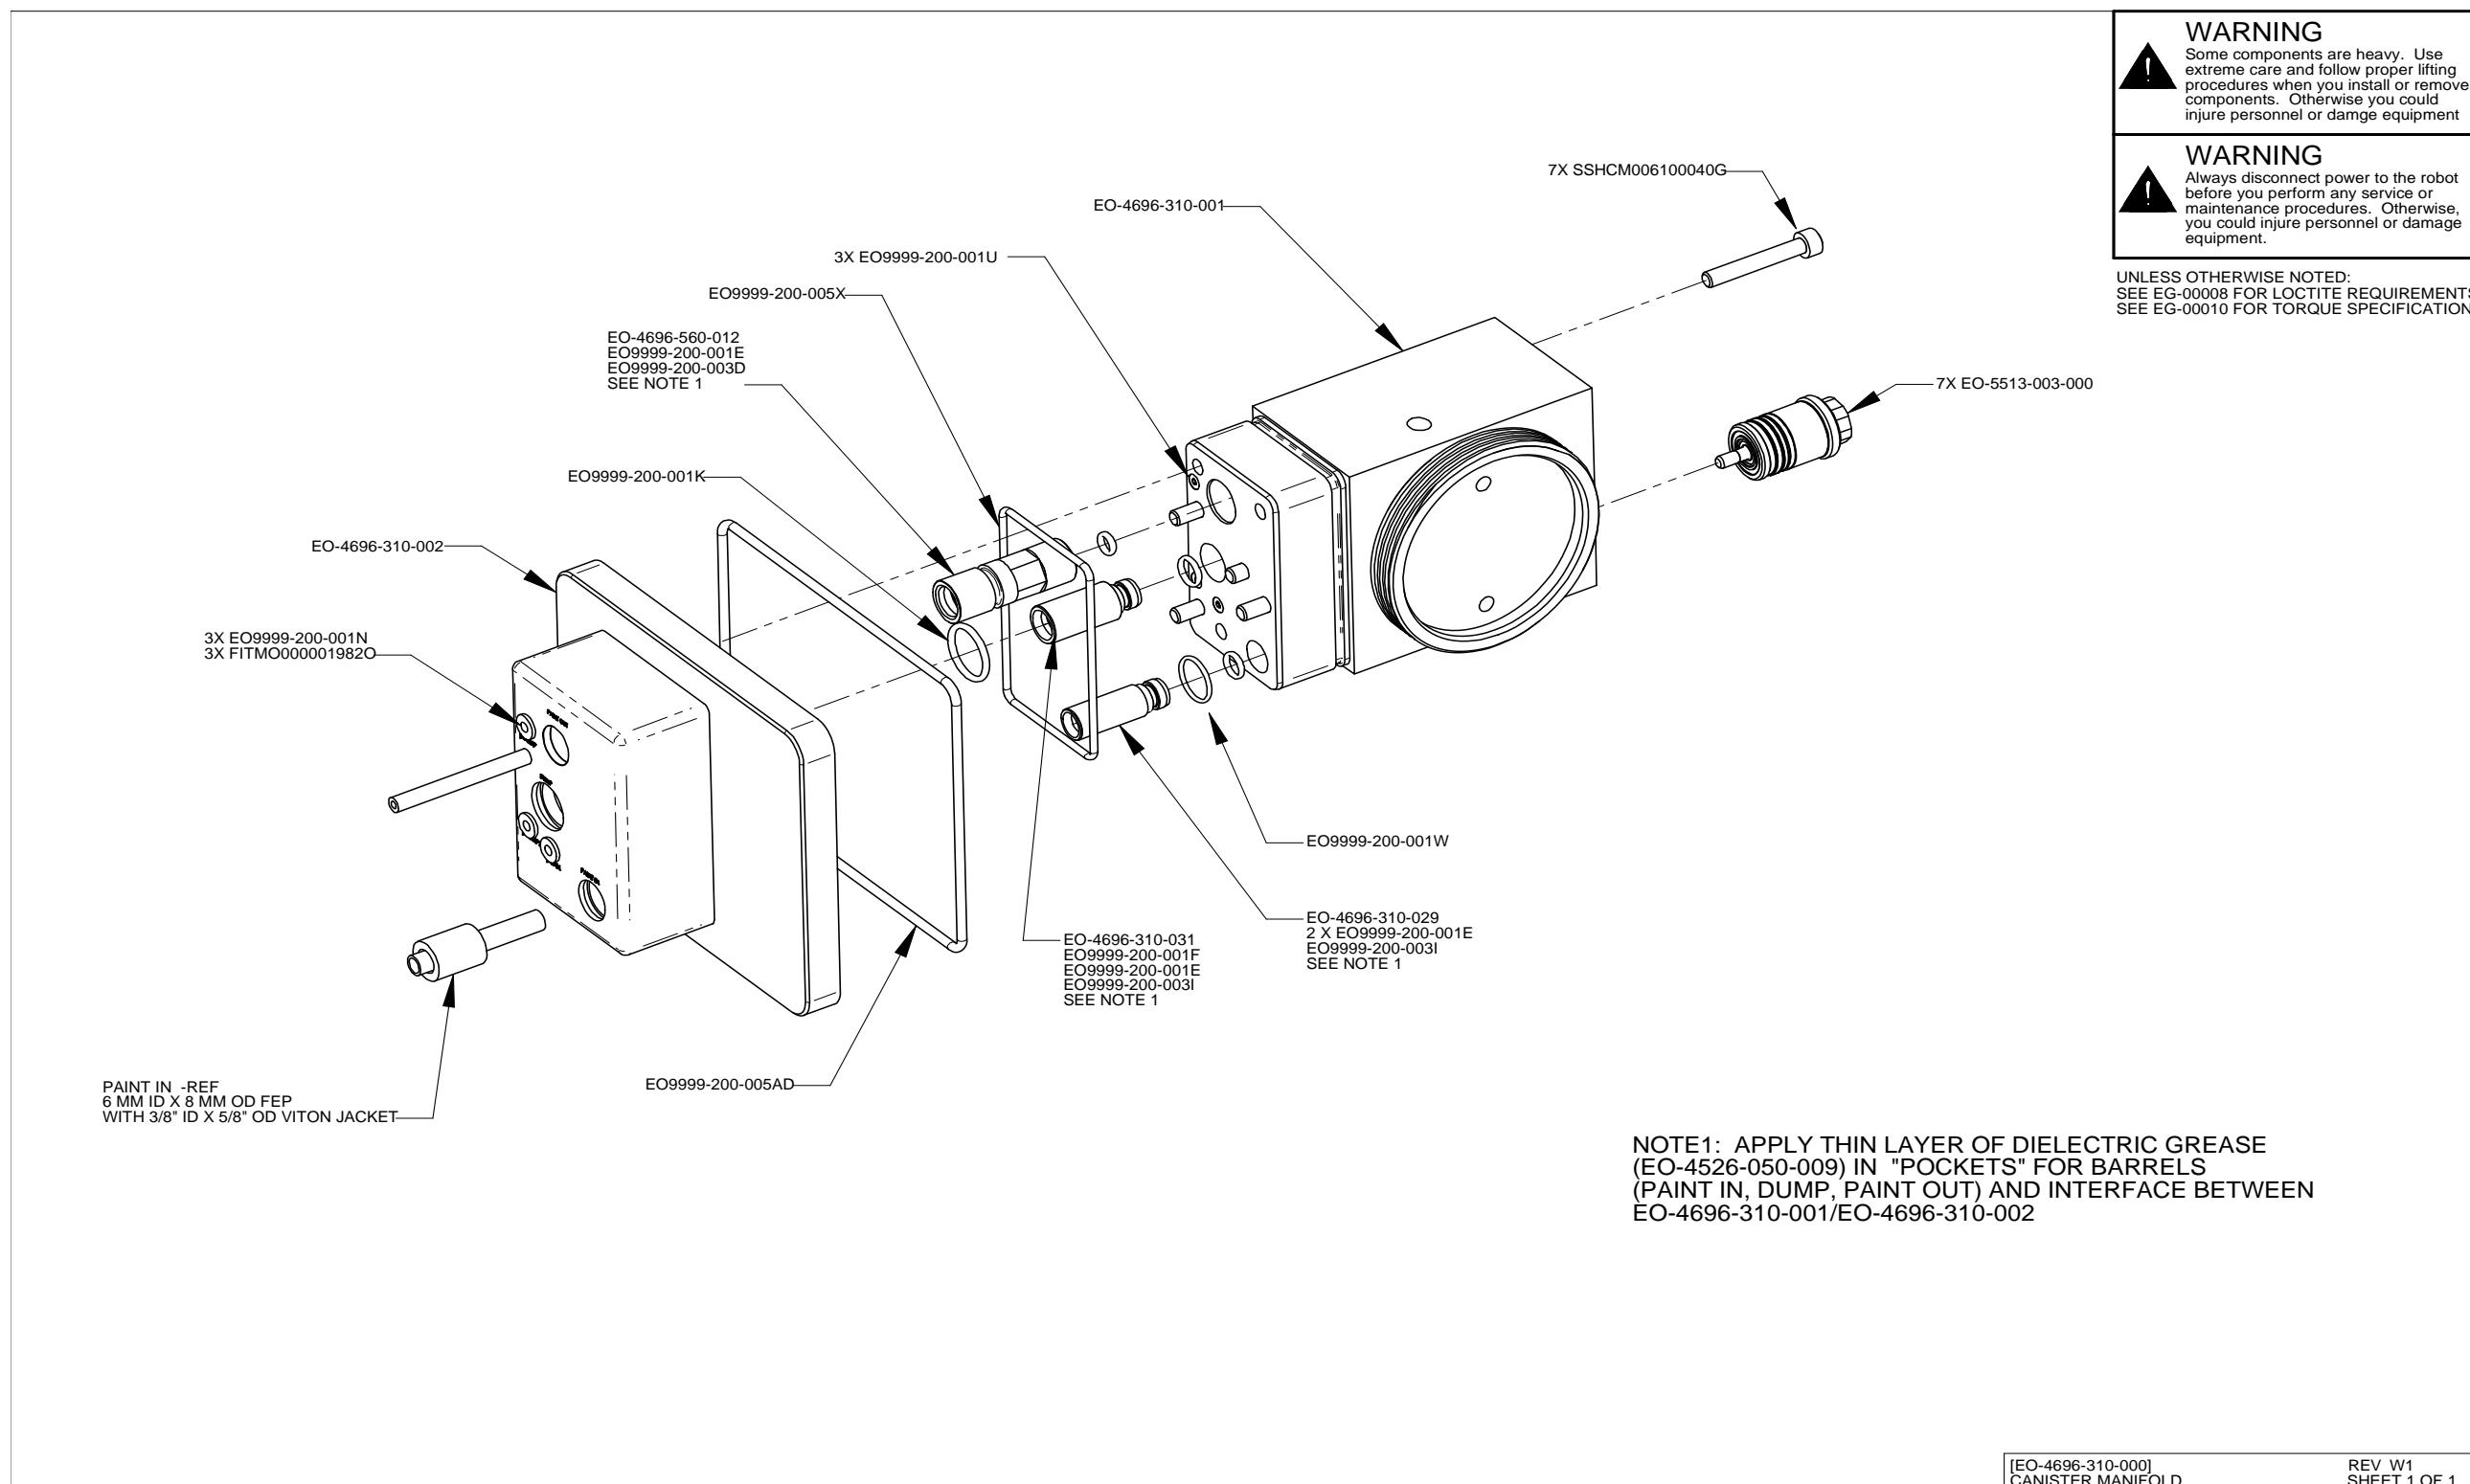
EO-4696-310-000, CANISTER MANIFOLD
